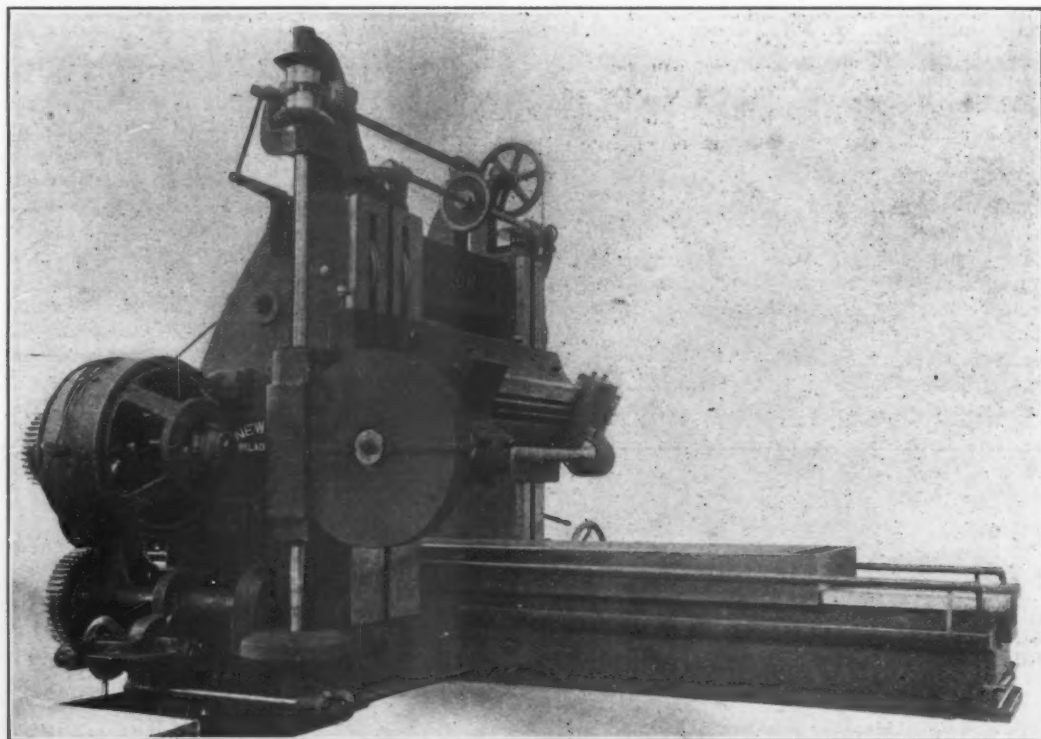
The New No. 7 Plain Horizontal Slab Milling Machine Built by the Newton Machine Tool Works, Inc., Philadelphia, Pa.
